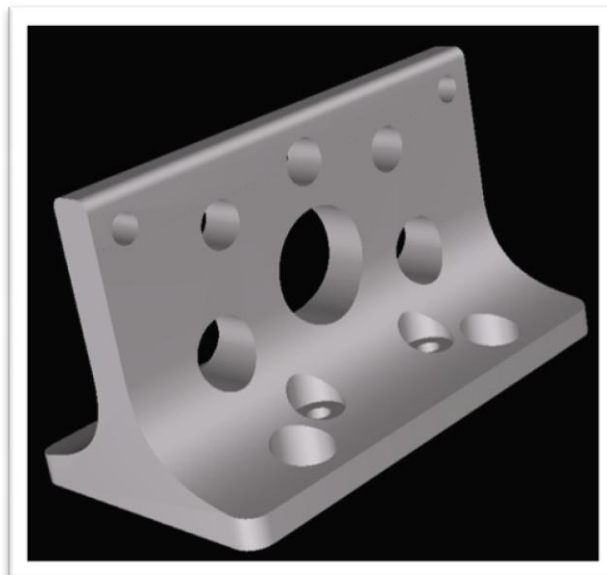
eXperimental CNC machine version of the stabilizer foot wheel bracket
